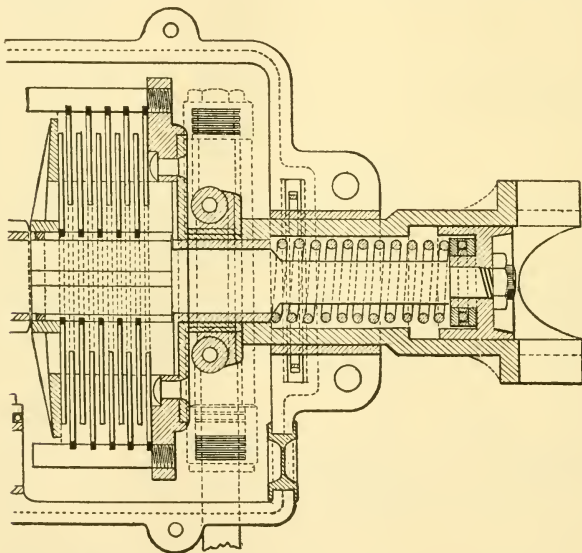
Multiple disc clutch; sectional view showing construction.
